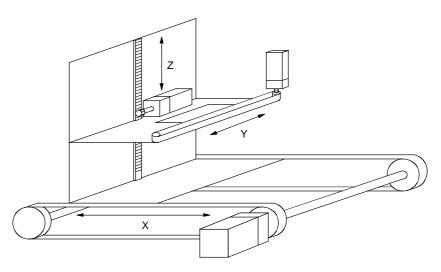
Line drawing of a three-axis conveyor vehicle
